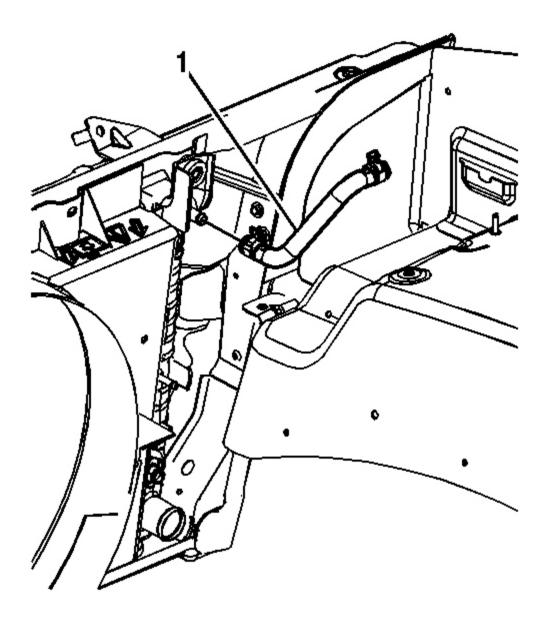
Surge Tank Hose & Radiator Courtesy of GENERAL MOTORS CORP.
